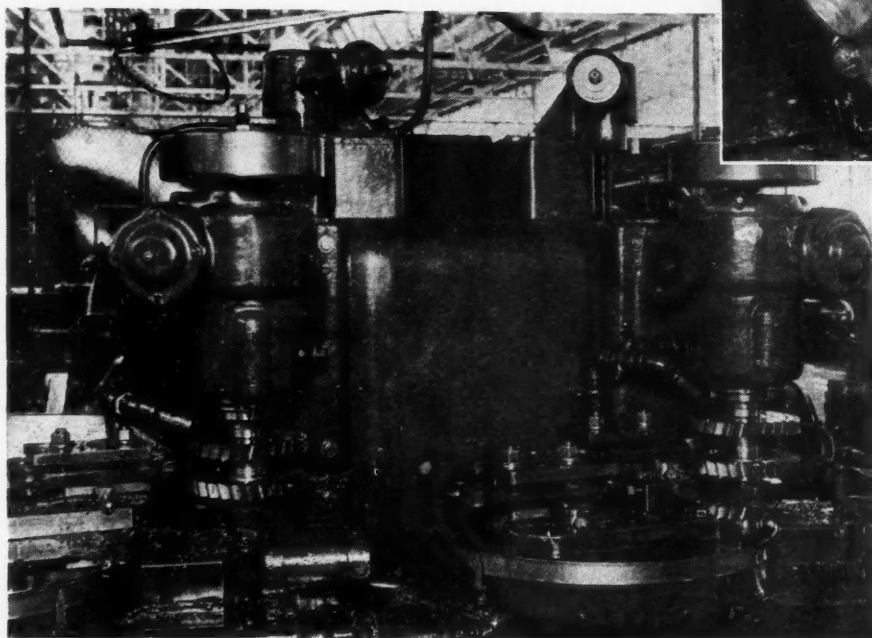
(Left) Sundstrand machine arranged for milling operation on ends of link rods. Work pieces are clamped on rotary tables and the operation is continuous. Cutters on the left spindle mill both faces on one end of the articulated rod and the operator changes rods to the table at the right for facing the other end which is of different thickness. Various types of rods can be quickly accommodated on this machine by a simple changeover of the turntable clamping fixtures.
